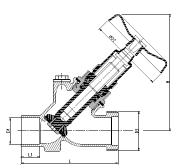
Alwa-Valve with soldering connection on inlet and soldering connection set on outlet
